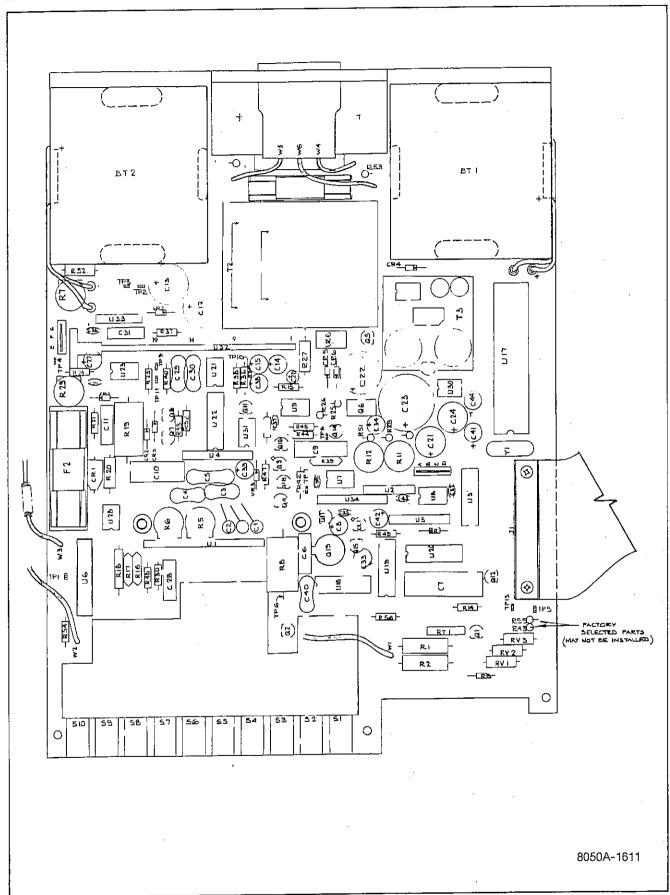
A1 Main PCB Assembly, 8050A-01
